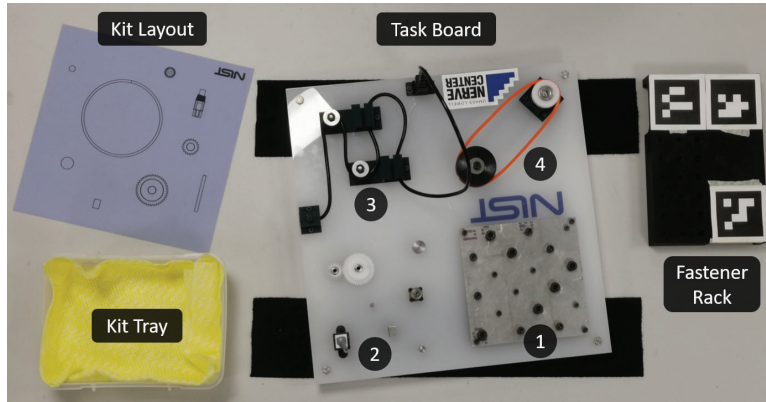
The task board contains four different tasks: 1) Fastener Threading, 2) Insertions, 3) Wire Routing, and 4) Belt Threading and Tensioning. The kit tray is used for collecting disassembled parts during disassembly tasks. The fastener rack was only used during assembly tasks where at the beginning of assembly the fasteners would be located in the rack. Before task execution, the kit layout and fastener rack were utilized to arrange the components for assembly jobs.
